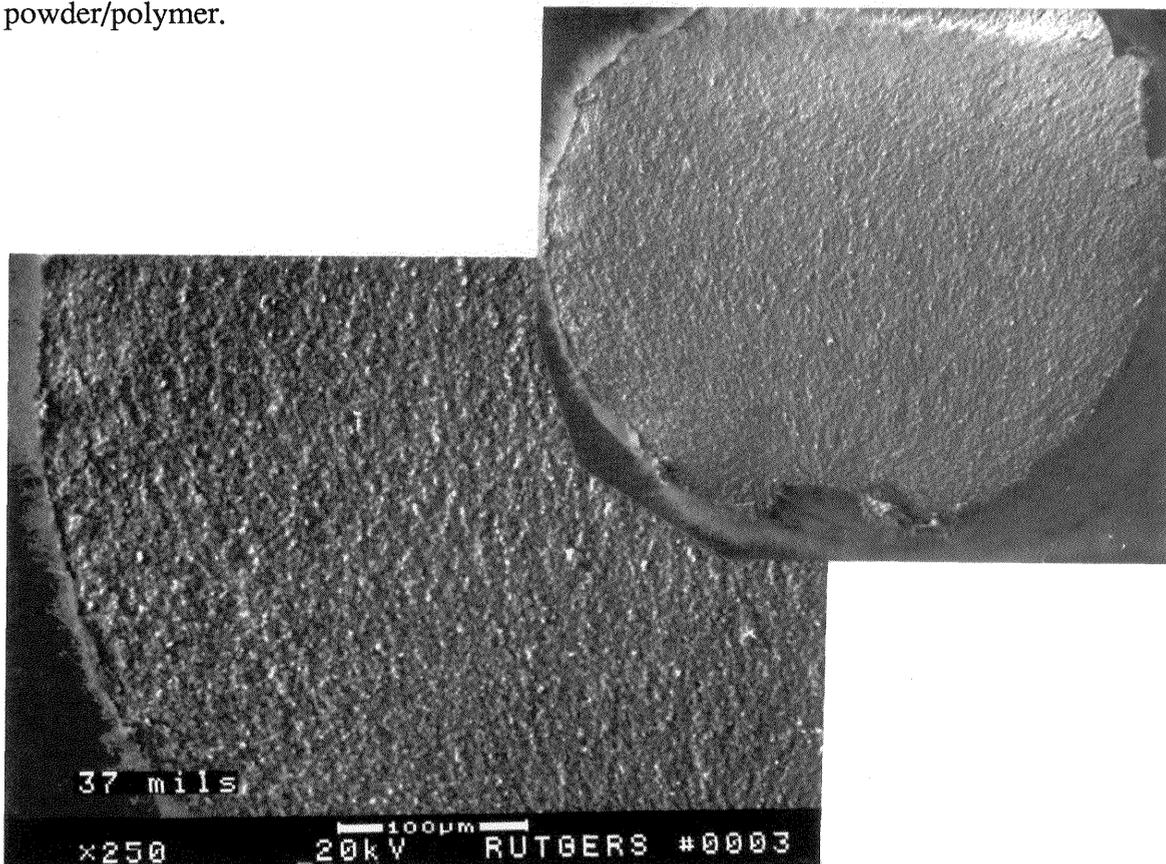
Backscatter SEM micrograph of the fracture surface of a 0.037" FDC single road showing a less uniform shape possibly due to nozzle wear (insert) but still a uniform dispersion.
